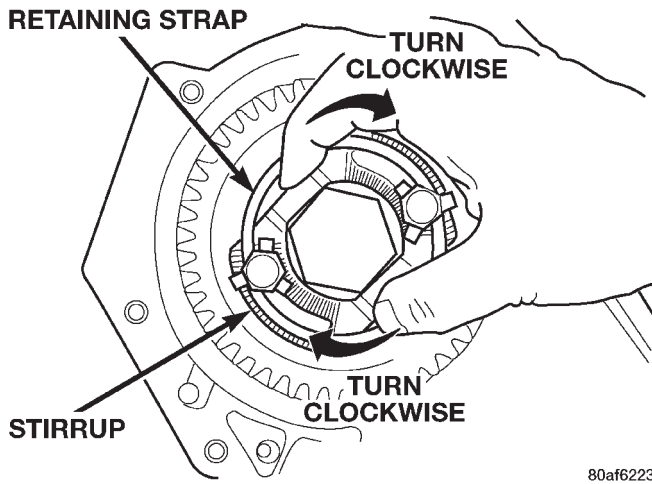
Turn Stirrup Clockwise Against Flats Of Output Gear Retaining Bolt
